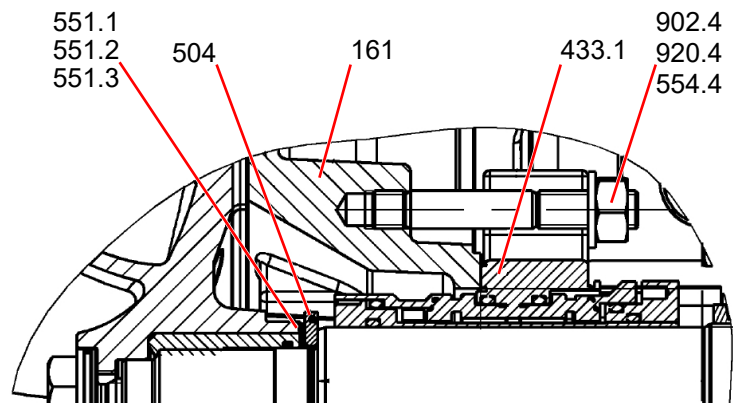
STANDARD Cartridge seal BS24 - BS32
